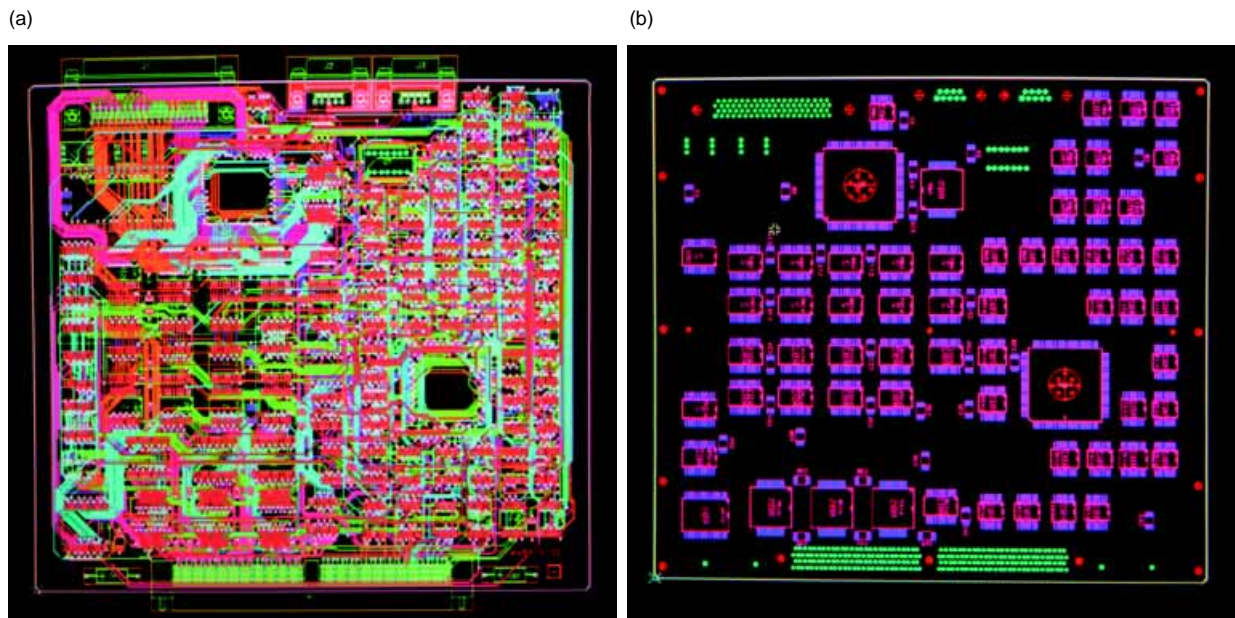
NEAR/RTX processor PWB (a) circuit layout drawing and (b) assembly drawing.
